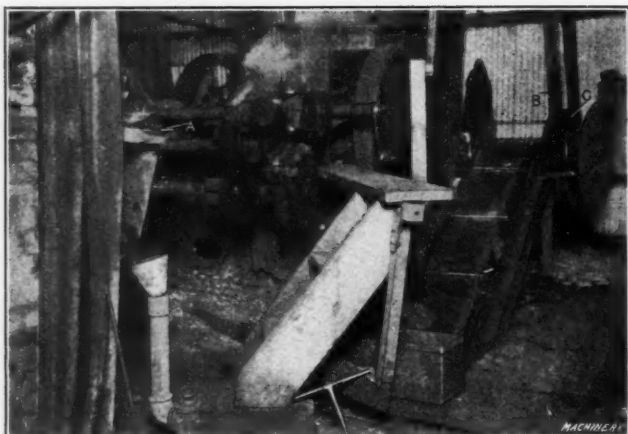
Close View showing Rod coming from Furnace and being fed into Acme Bolt and Rivet Machine by Feeding Rolls
